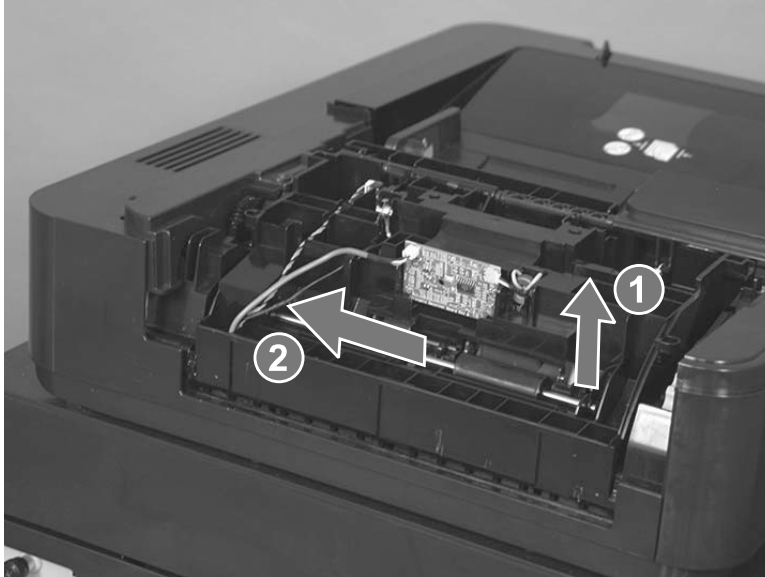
Remove the document-feeder roller cover (6 of 10)
